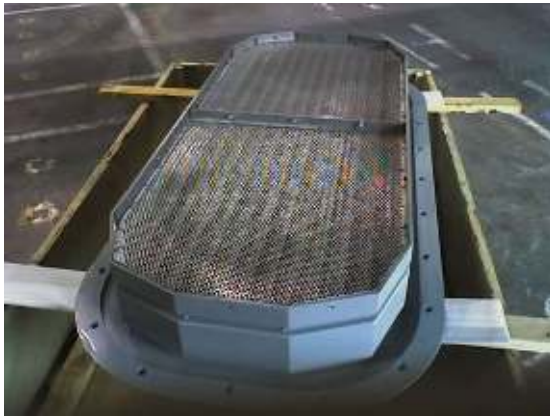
Final assembly of LPD louver showing the perforated steel FOD screen on outlet (back) side and ferrule reinforced bolt holes on mounting flange
